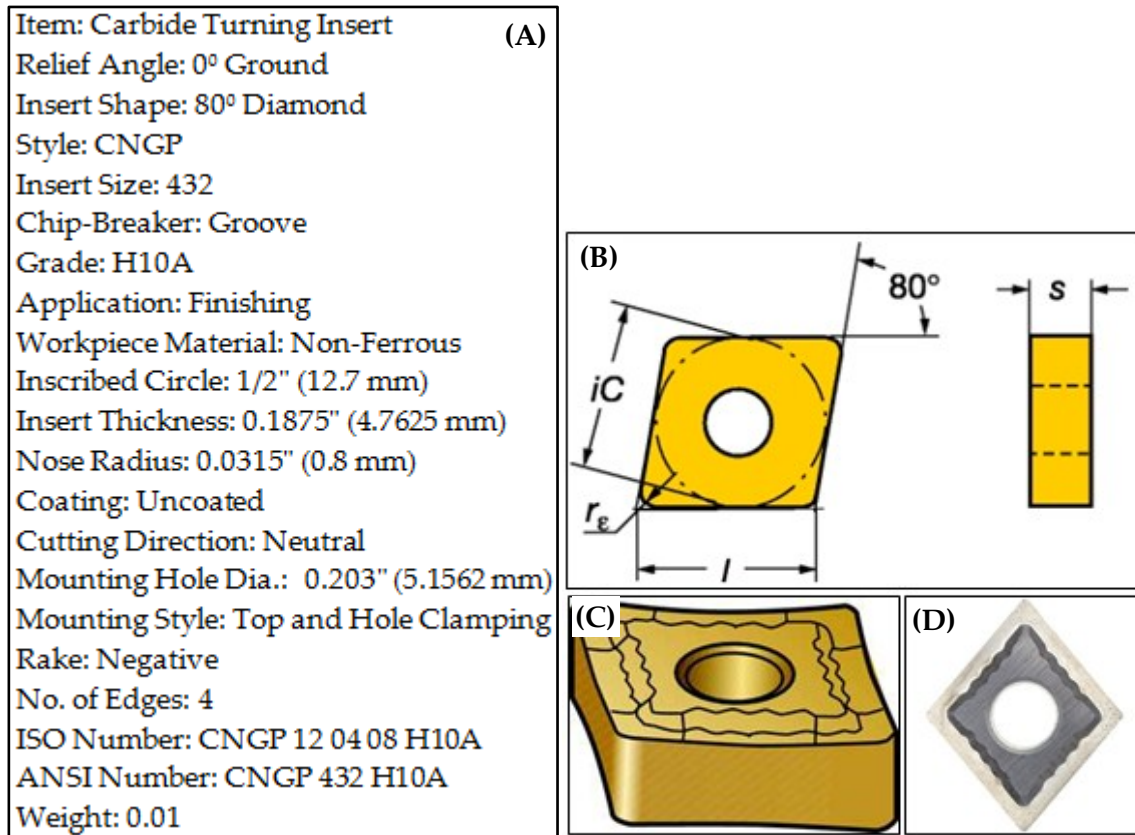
A) Relevant technical specifications of the Sandvik CNGP 12 04 08 H10A insert [122], (B) Insert dimensions, (C) Solid model, and (D) Image of insert
